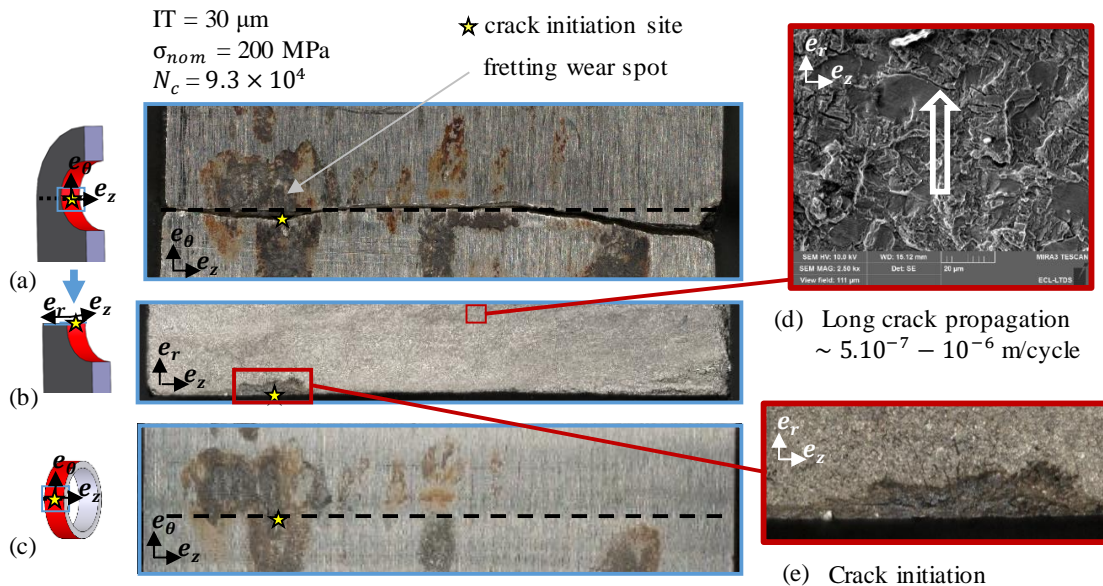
Optical observation of the (a) lug bore surface, (b) lug fracture surface, (c) bush surface at the failure area of a broken specimen and (d) SEM observation of the lug fracture surface showing fatigue striations, (e) crack initiation site on the lug fracture surface ($\sigma_{nom} = 200 \text{ MPa}$, $IT = 30 \mu\text{m}$, $N_c = 9.4 \times 10^4$)
